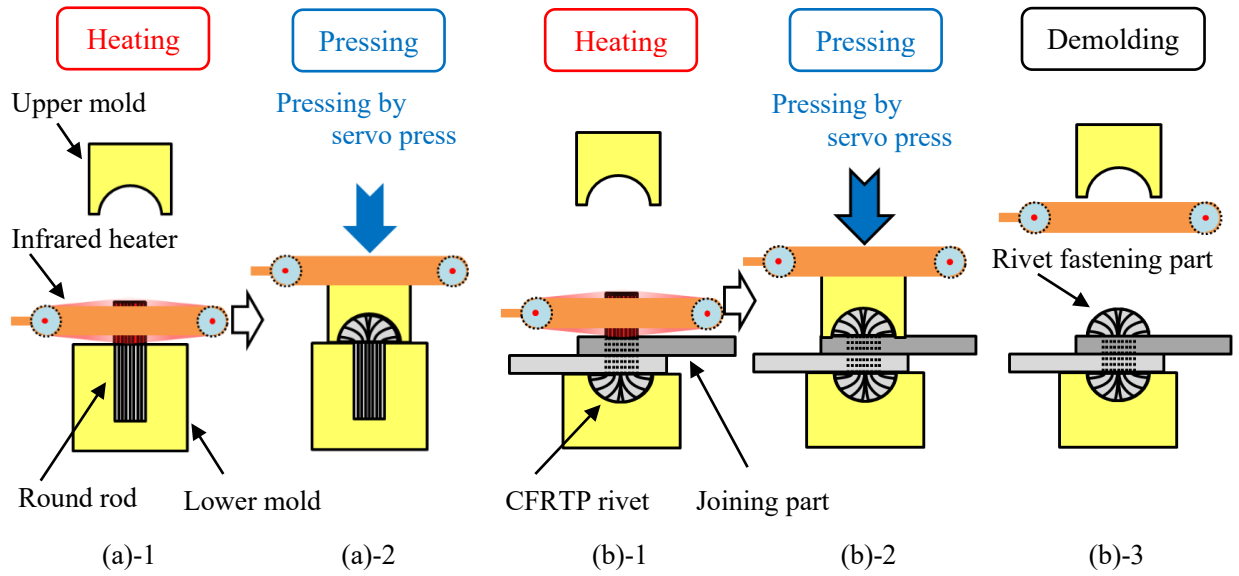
Molding and fastening process of CFRTP rivet using servo press machine.
